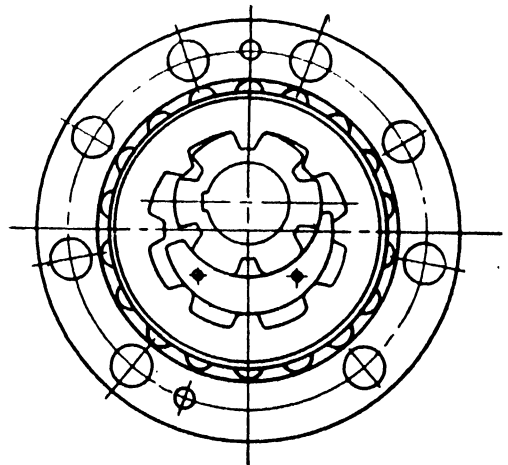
Principle of Rota Roll pump. (*Sundstrand Machine Tool Co., Rockford, Ill.*)
